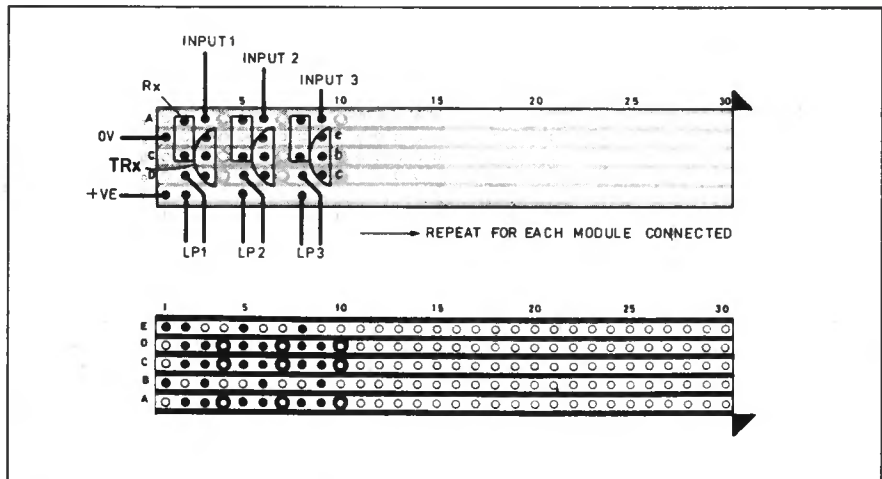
Layout of three circuits as in Fig. 12 assembled on strip-board.
